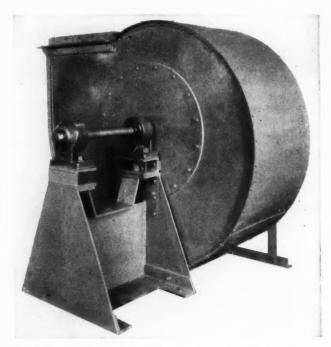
Complete blower unit. Shows all-welded drive shaft base and suction intake. Cast base cost 15¢ per pound. Welded steel base cost 12¢ per pound.
